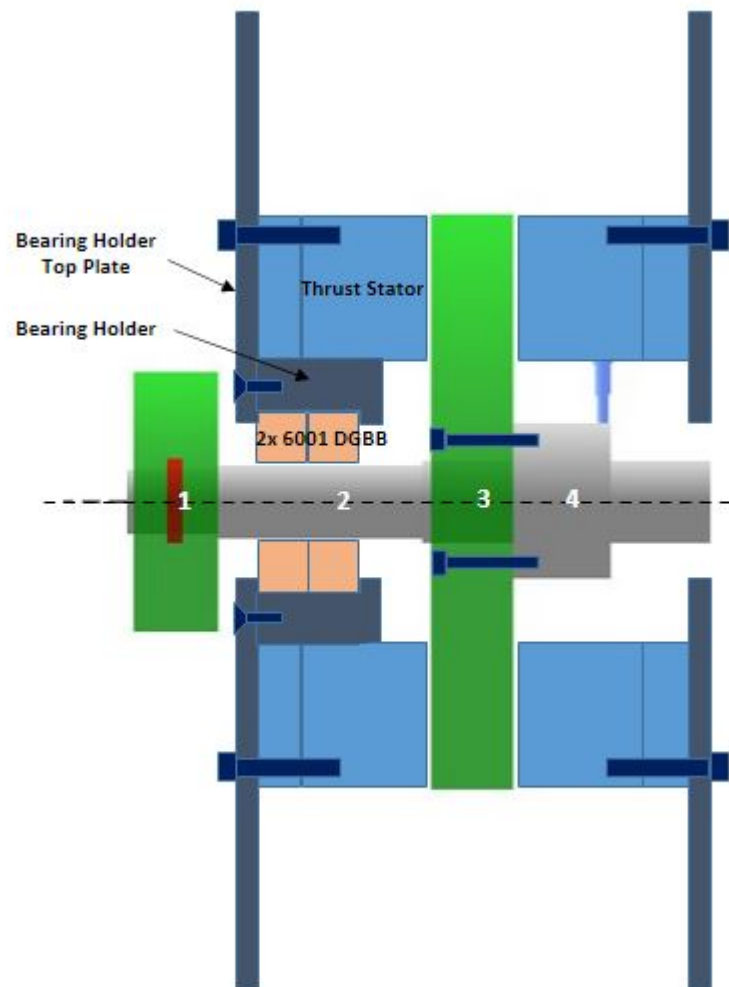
DE Backup Bearings: Double Row Deep Groove Ball Bearings
